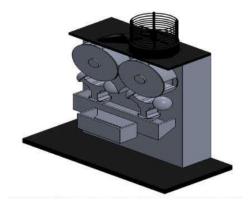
Solid work Design of Pulp Extractor Machine [29].
